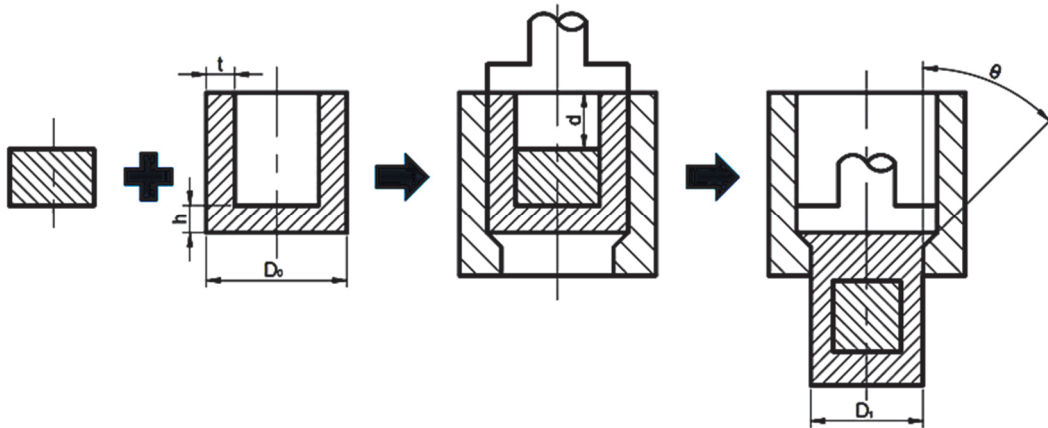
Process using extrusion to make core-shell type metal composite bulks
